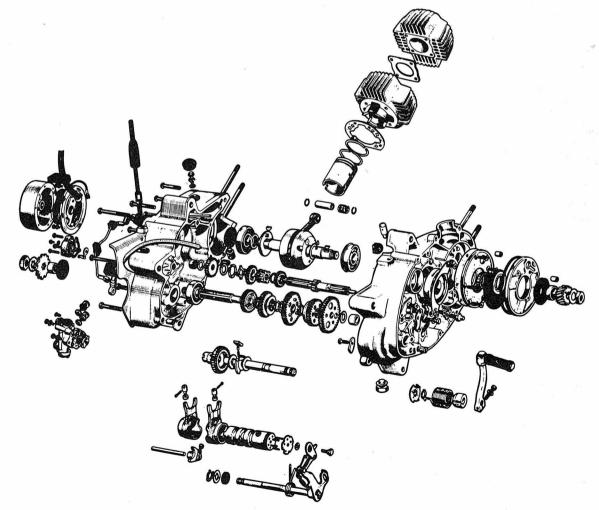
Exploded view of engine assembly typical of rotary valve 50cc models.
